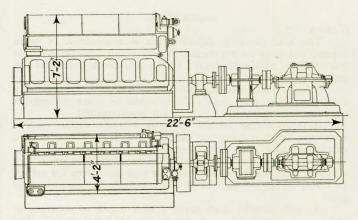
241 h.p. Diesel driven pump with 568/1,770 r.p.m. epicyclic gear
